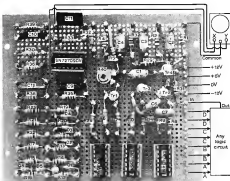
A photograph of the prototype showing component positions. It should be noted that some parts have been mounted on the reverse side of the board and are therefore not marked. The integrated circuits are plugged thru dual-in-line sockets which enables for easy removal.
